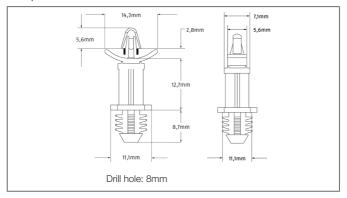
Board holder, drill version, wood, for 64PXL Board 2.0, 16PXL Board 2.0 and 16PXL Strip 2.0
